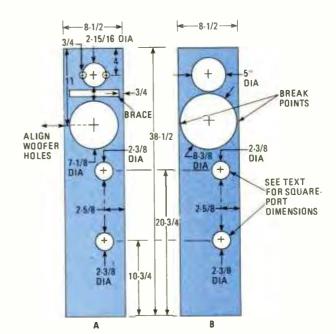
All dimensions for the speaker board (A) and the faceplate (B) are given in inches. Allow your saw to cut through the remaining thin pieces of board on the faceplate while cutting the hole for the woofer.
